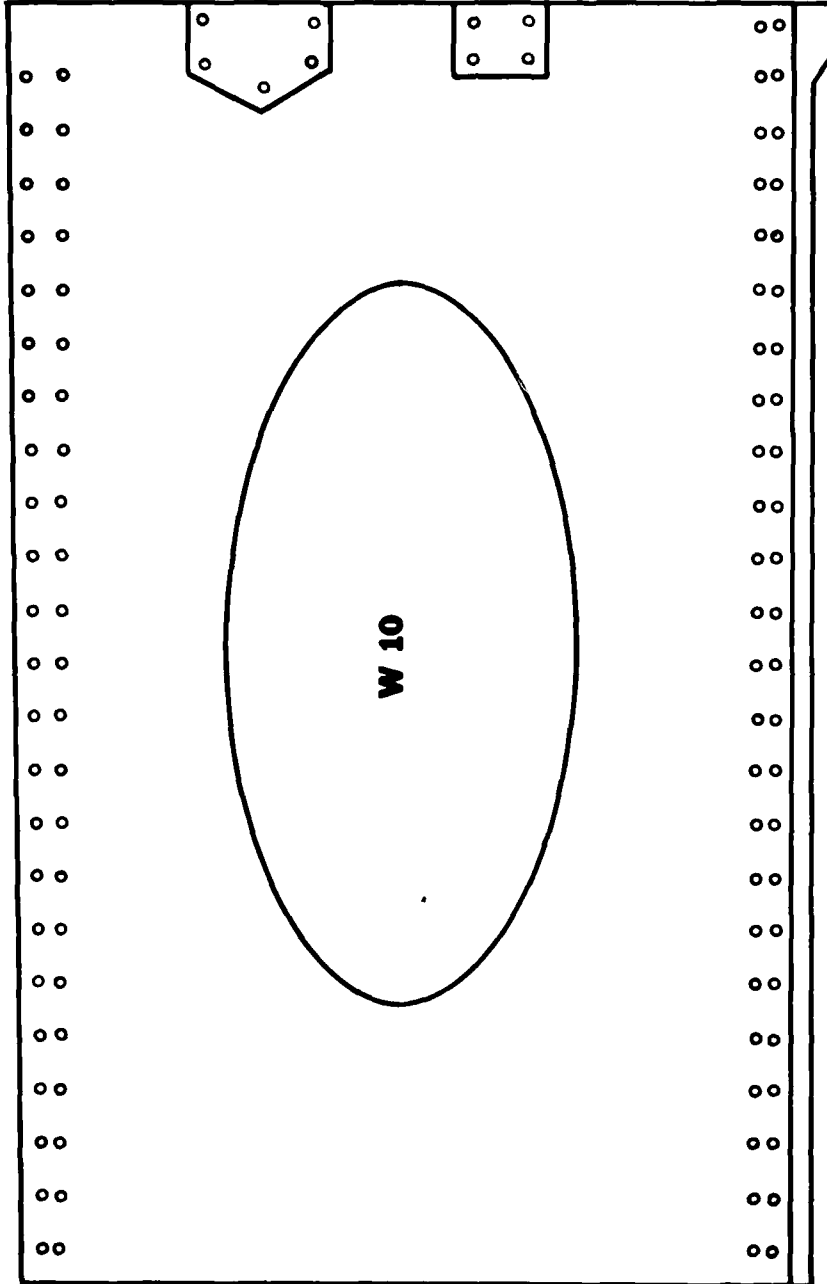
Geometric Orientation of Fasteners on a Wing Underside Center Spar.
